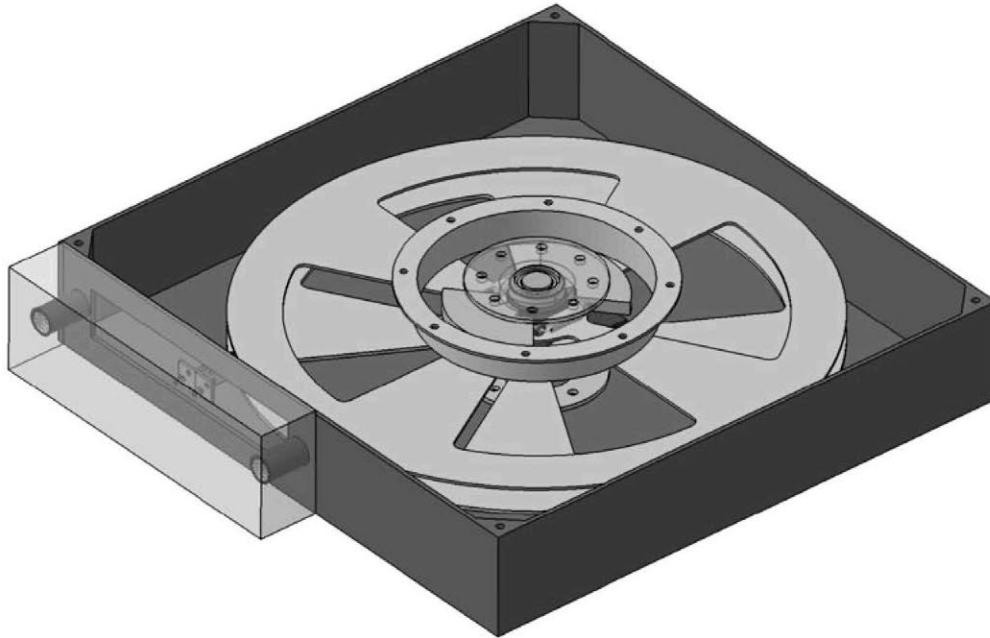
Passive tether deployment mechanism. Deployer size, including the end mass, is 670mm x 710mm x 123mm. The reel is capable of holding a 6 km long tether.
